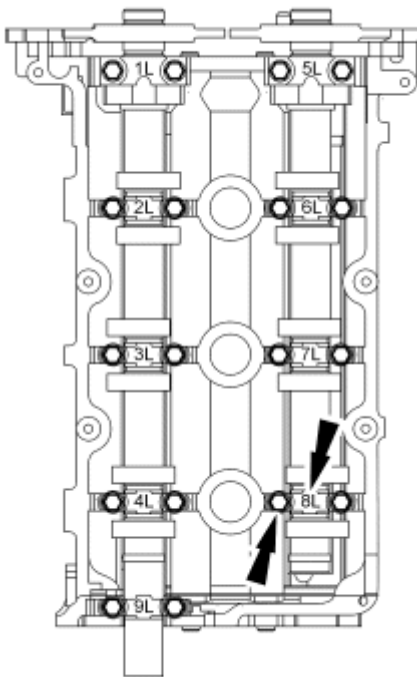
Identifying Camshaft Bearing Caps Bolts Installing Sequence
